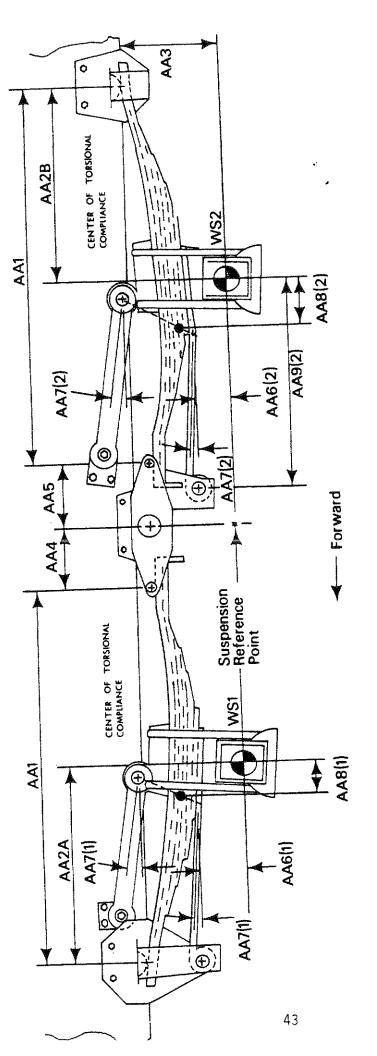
The MTRFSS with spring-type lower torque rods.
